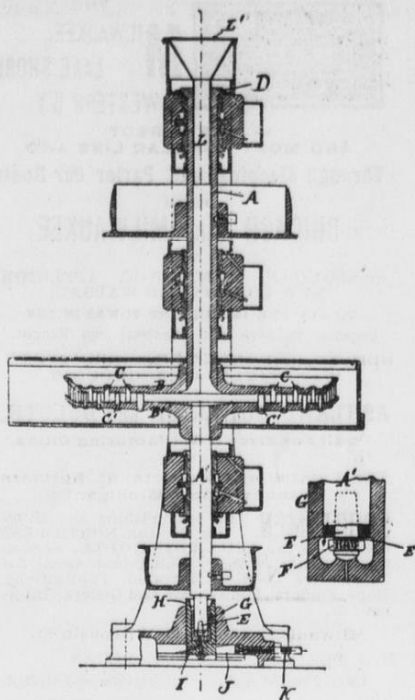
HIGNETTE'S PATENT DISINTEGRATOR—Sectional End View
